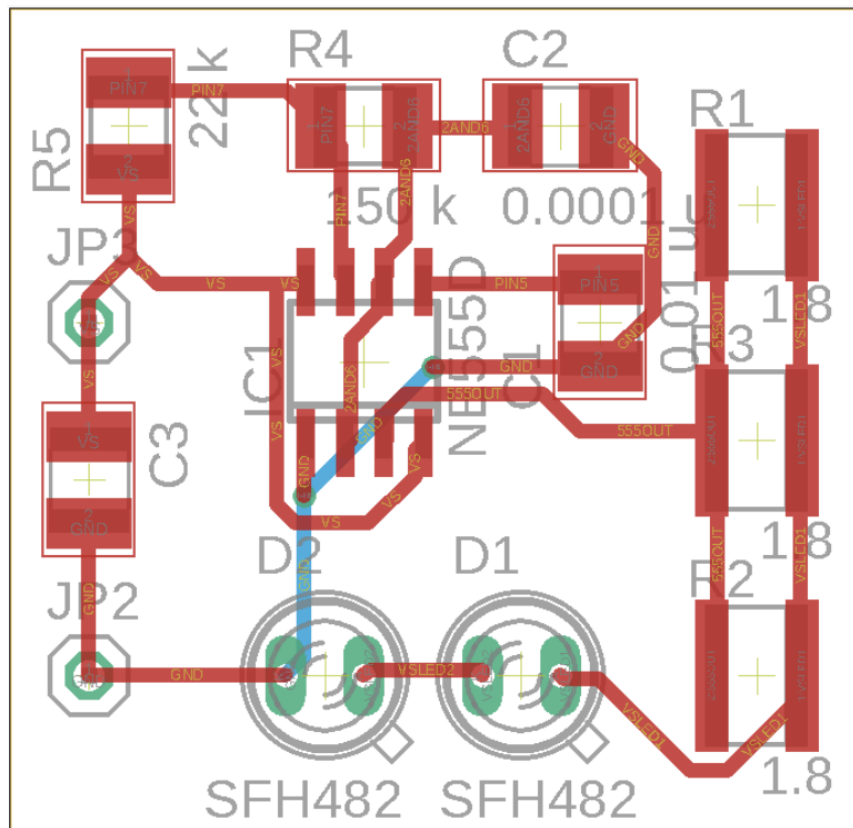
Final Step Sensor Emitter Circuit PCB
